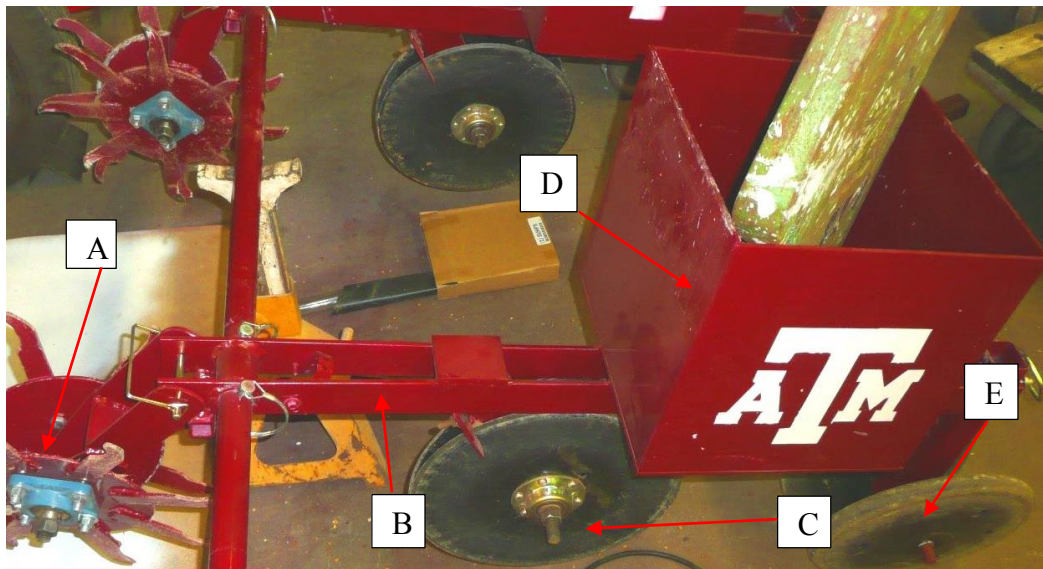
Constructed Seeder Unit. A) Residue manager B) Seeder unit frame C) Furrow opener D) Weight box E) Press wheel
